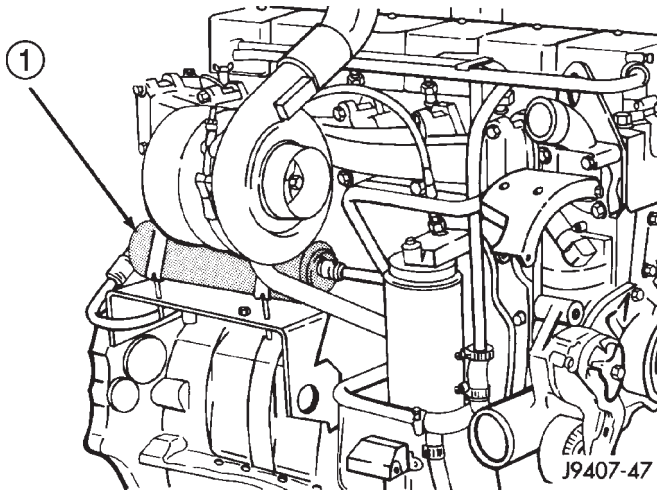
Transmission Water-To- Oil Cooler—Diesel
